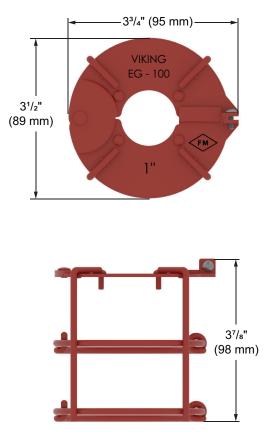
EG Series Guard/Water Shield Markings and Dimensions
